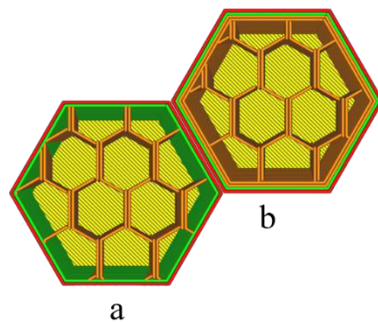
Extra Infill Wall Count – (a) standard walls, (b) extra walls.
